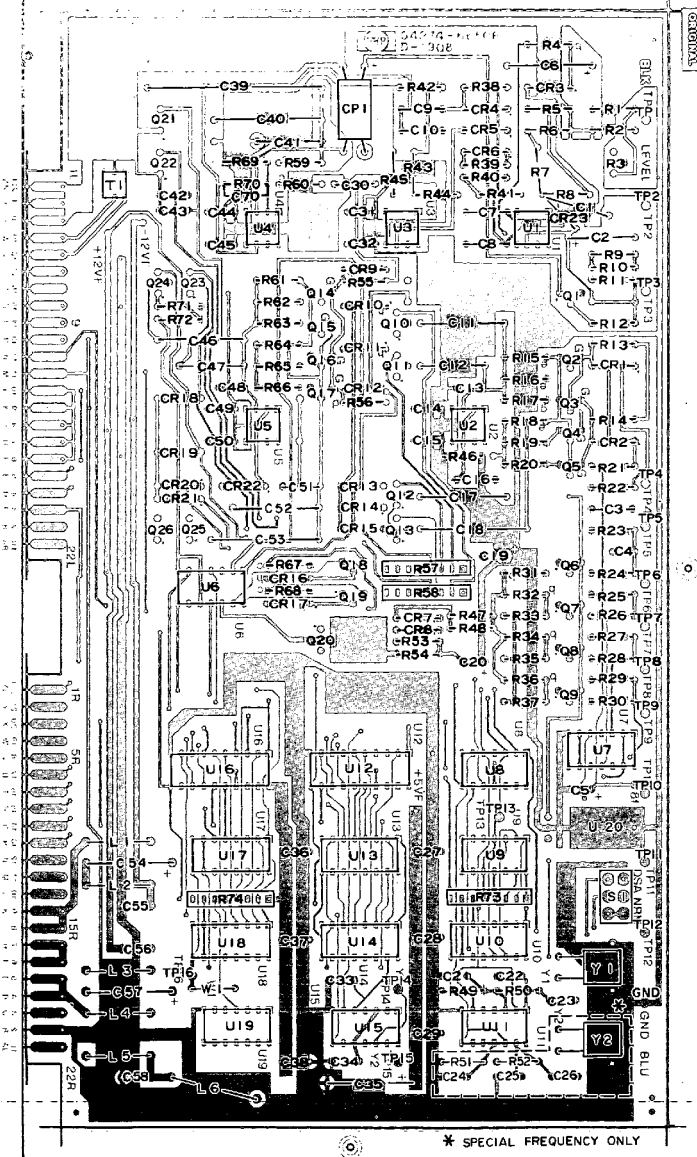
A6 OSCILLATOR ASSEMBLY COMPONENT LOCATIONS.
